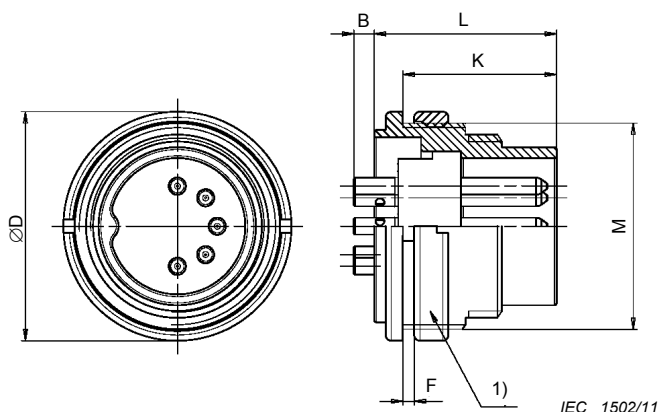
Fixed connector, male contacts, IP40, front mounting
